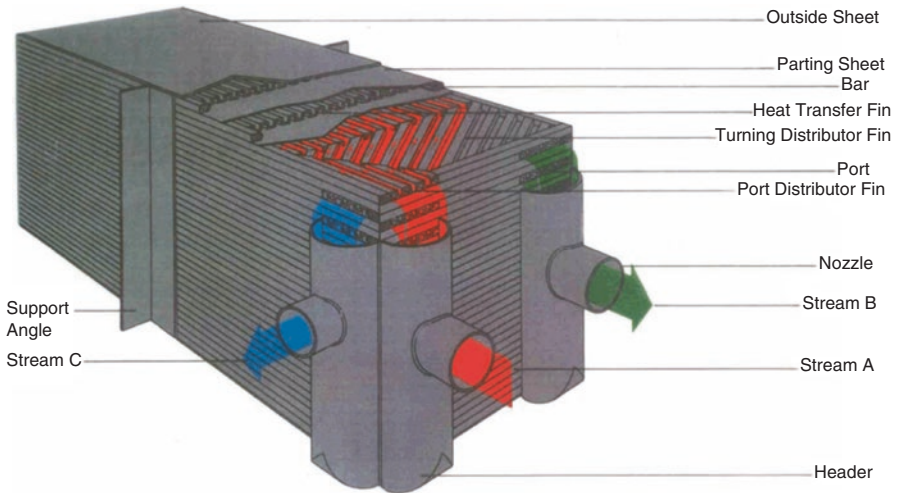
Schematic view of a brazed aluminum plate heat exchanger
